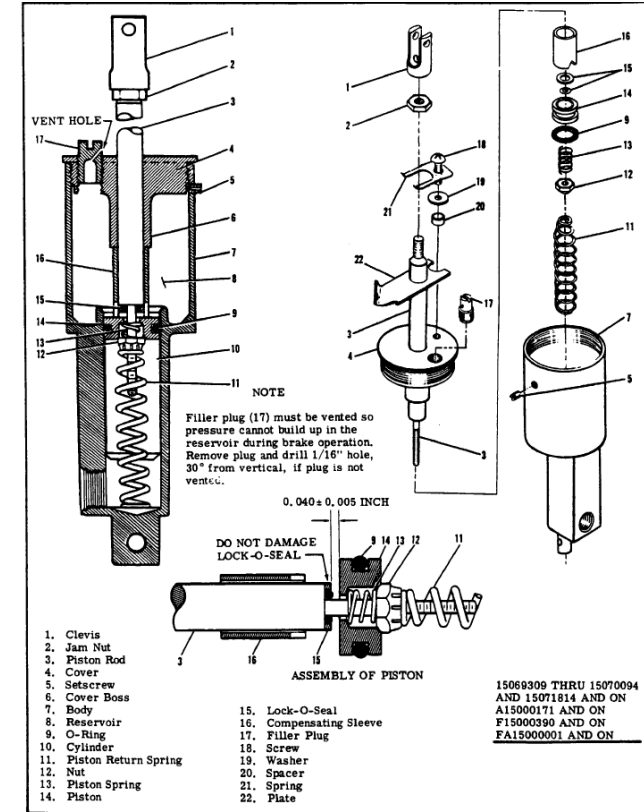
Brake Master Cylinder (Sheet 1 of 2)
